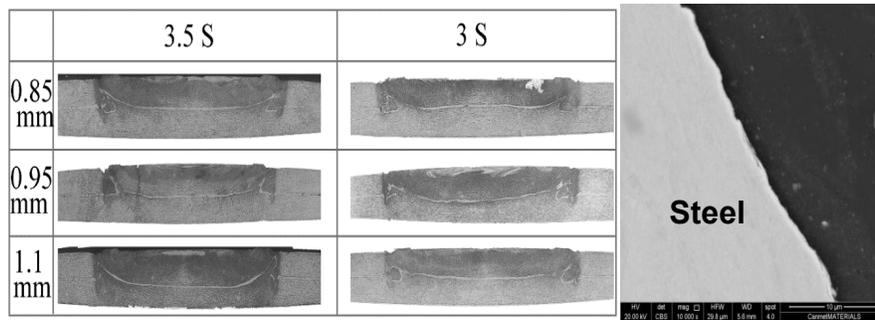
Friction stir spot welding micrographs showing the weld interface
